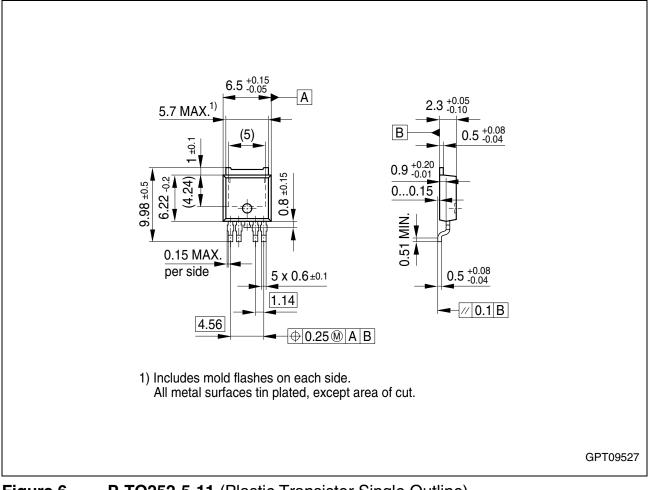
P-TO252-5-11 (Plastic Transistor Single Outline)
